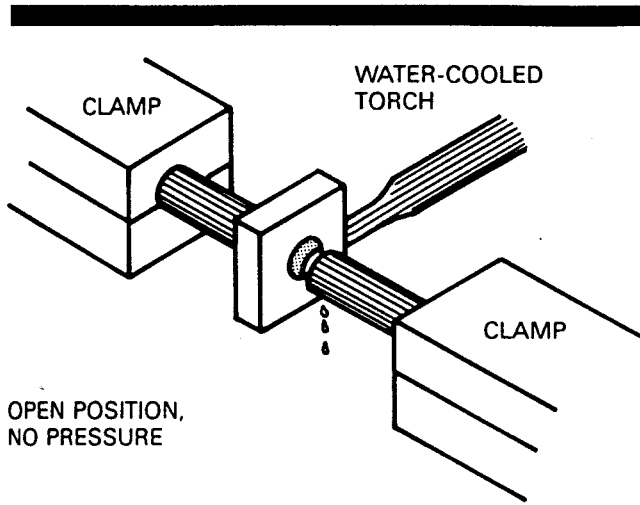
Torch and General Setup for Open Joint Pressure Gas Welding
